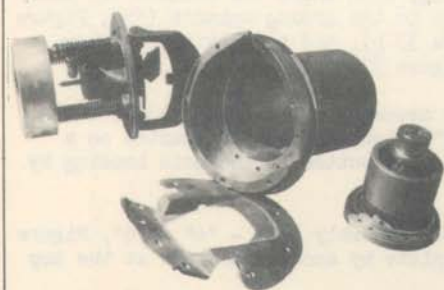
a consists of general views of components of the exploder. The exploder-booster assembly may be broken down into four main components:
